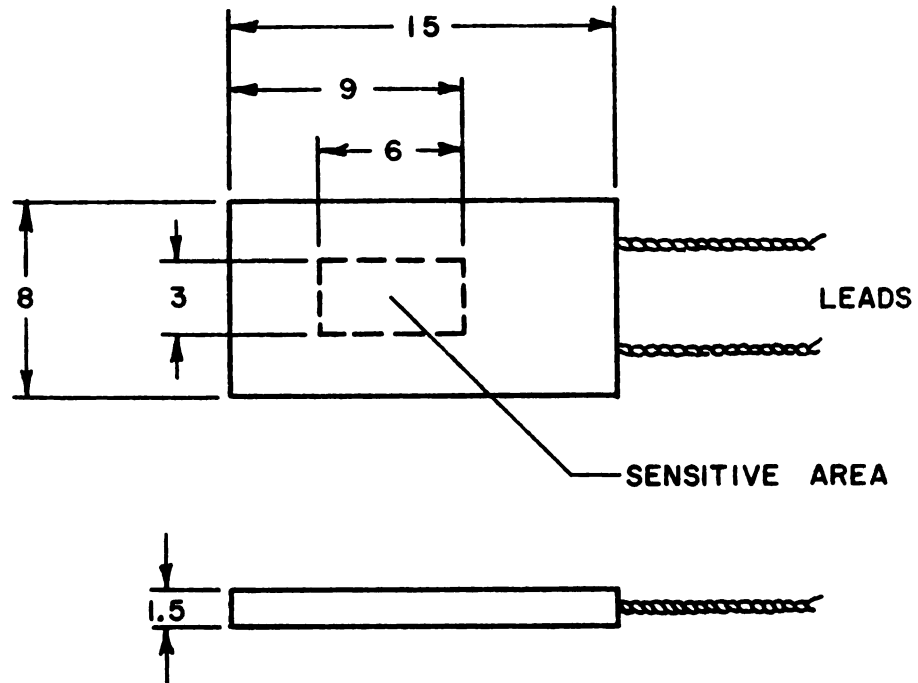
Diagram of Siemens FC33 Hall probe. All dimensions in millimeters.
